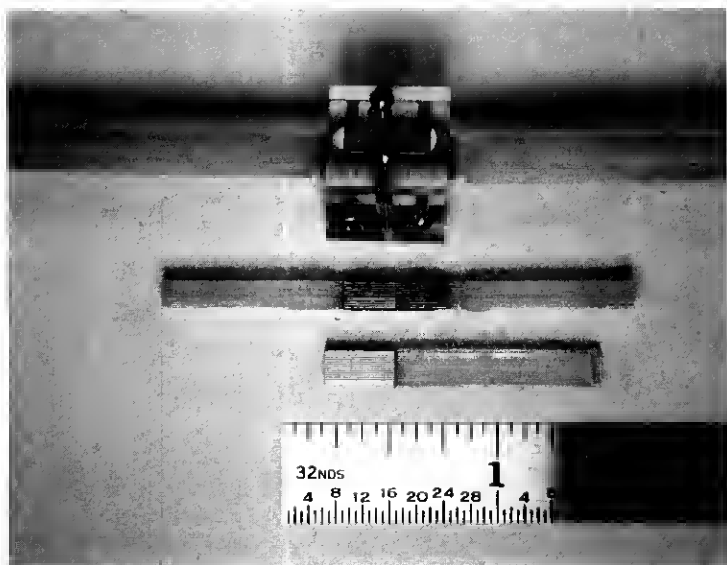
Top: final alignment fixture; middle: epoxied splice; bottom: single connector.
